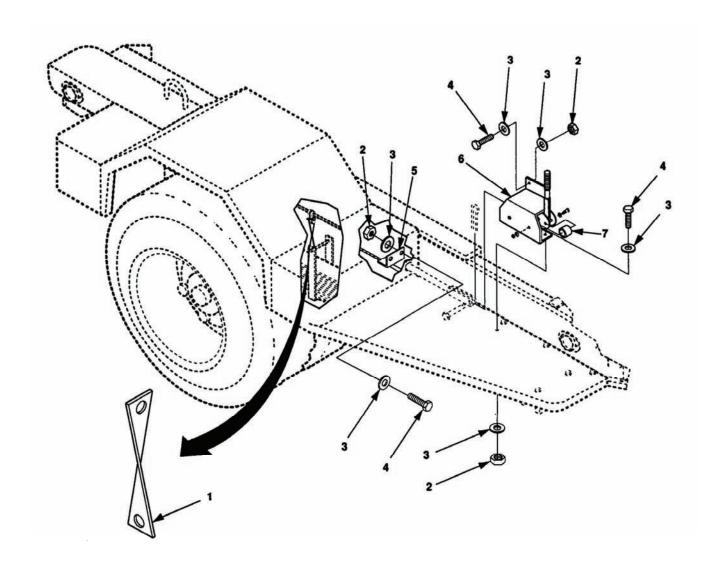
Brake Assembly 2.5 Ton Trailer.
